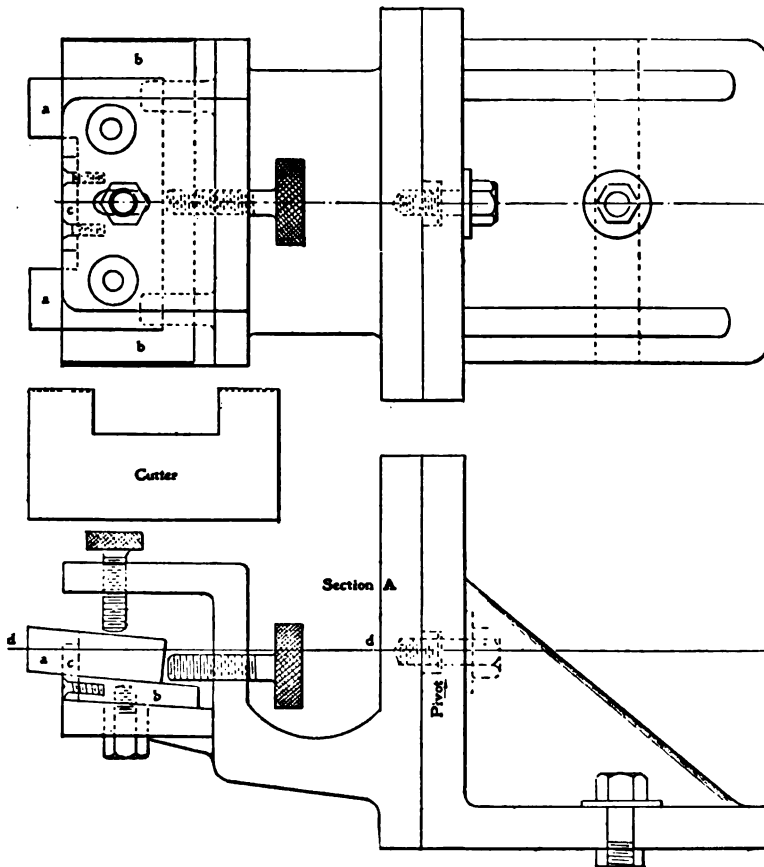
Fixture for Grinding Boring Bars and Counterbore Cutters.
